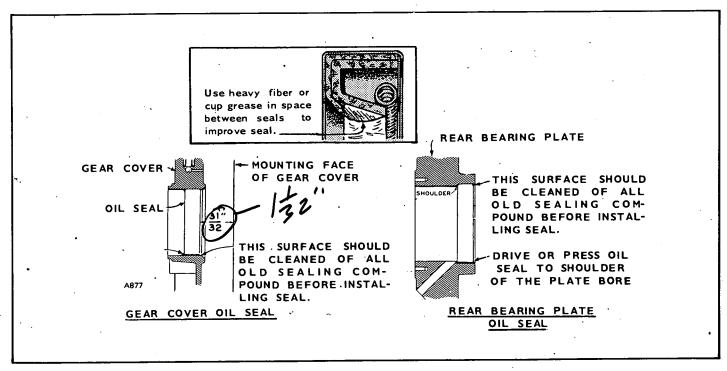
GEAR COVER AND REAR BEARING PLATE OIL SEALS
